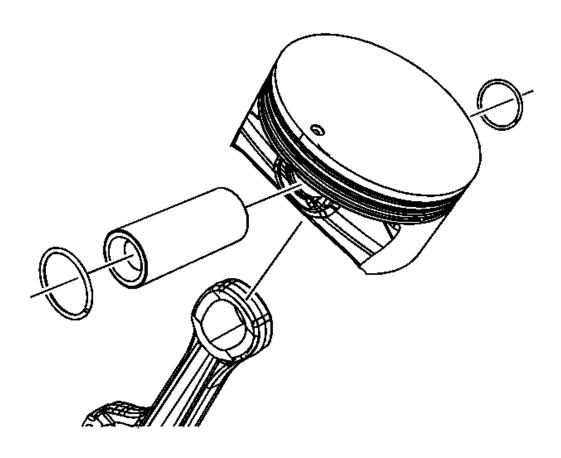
Piston Pin, Piston & Connecting Rod Courtesy of GENERAL MOTORS CORP.
